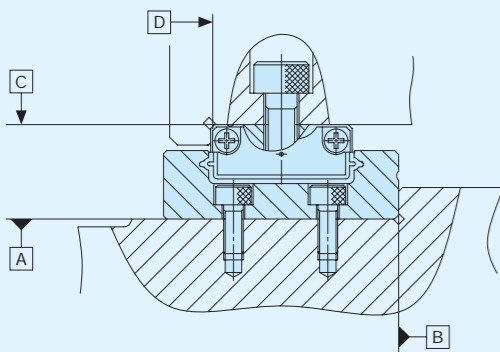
C-Sleeve Linear Way MUL Reference mounting surfaces and general mounting structure
